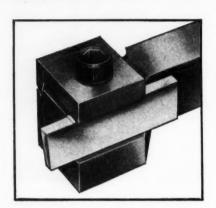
Grooving and Cutting-off Tool with Solid Kennametal Clamped-in Blade
